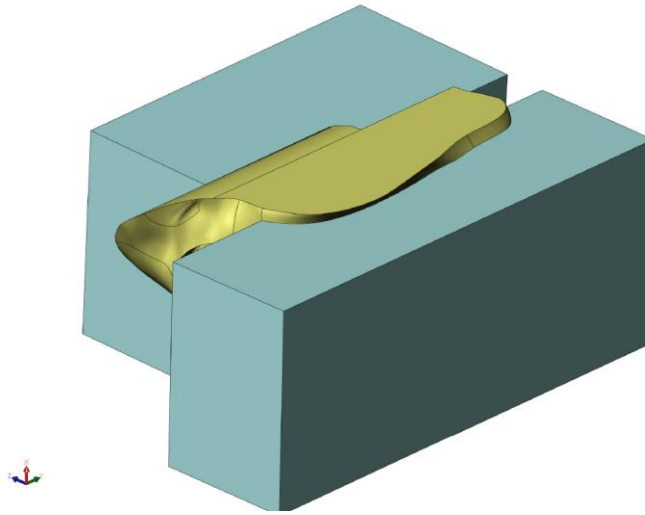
Final assembly of the part-implant clamping, showing the flat surfaces that will come in contact with the vice's clamping jaws.
